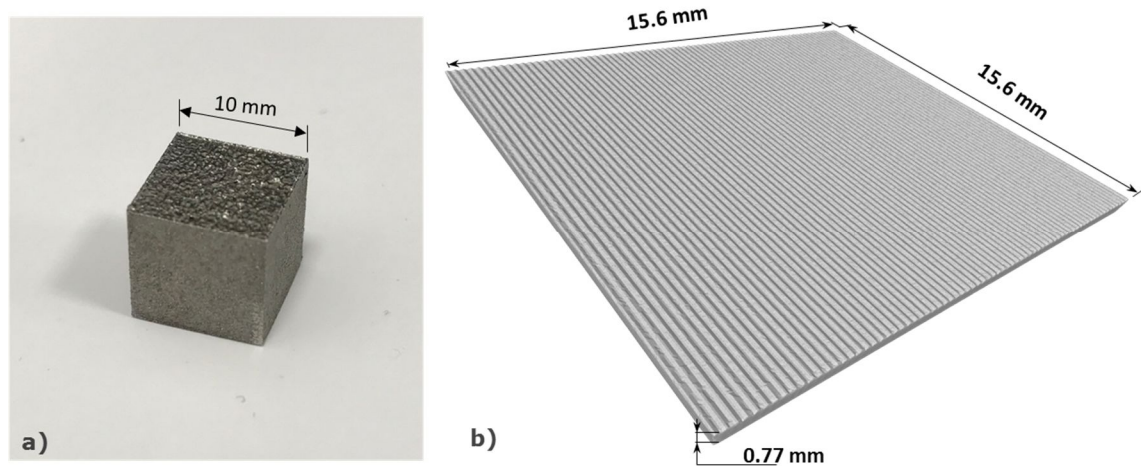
The test parts used in the later chapters. a) is used in chapter 5 and is an LBPF part and b) is used in chapter 6 and is a sinusoidal wave on a rectangle.
